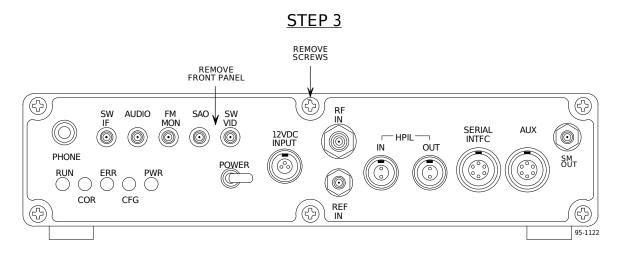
Removing the Miniceptor's Front and Rear Panels
